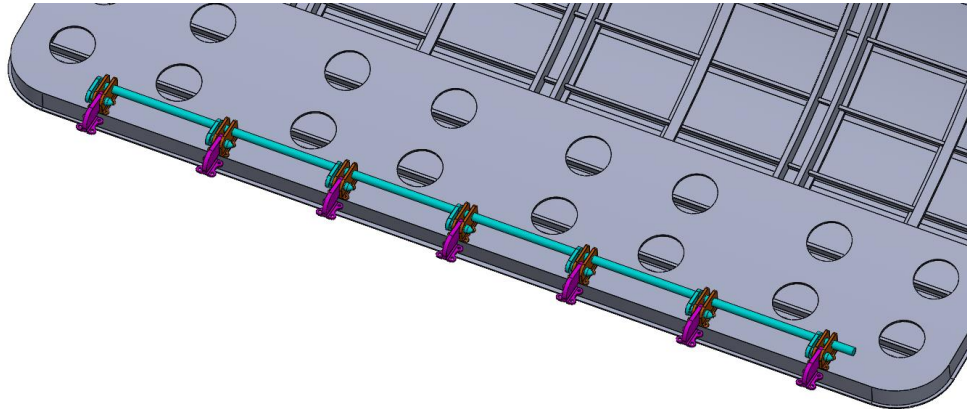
Door locking mechanism. Consist of fuselage lock lug -pink, door lock lug – brown, latch – blue.
